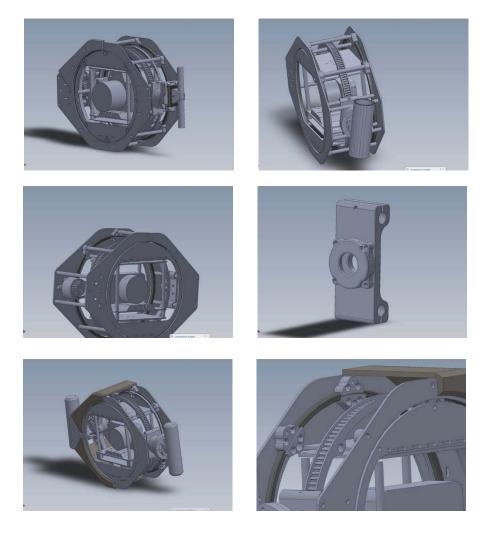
Last prototype before final materials prototype, including shock absorbing pads.
